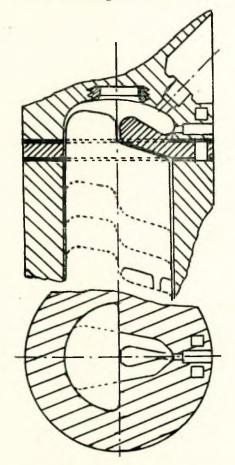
Stewit cylinder layout with "secondary head" for use with a Diesel running on vegetable oil.
